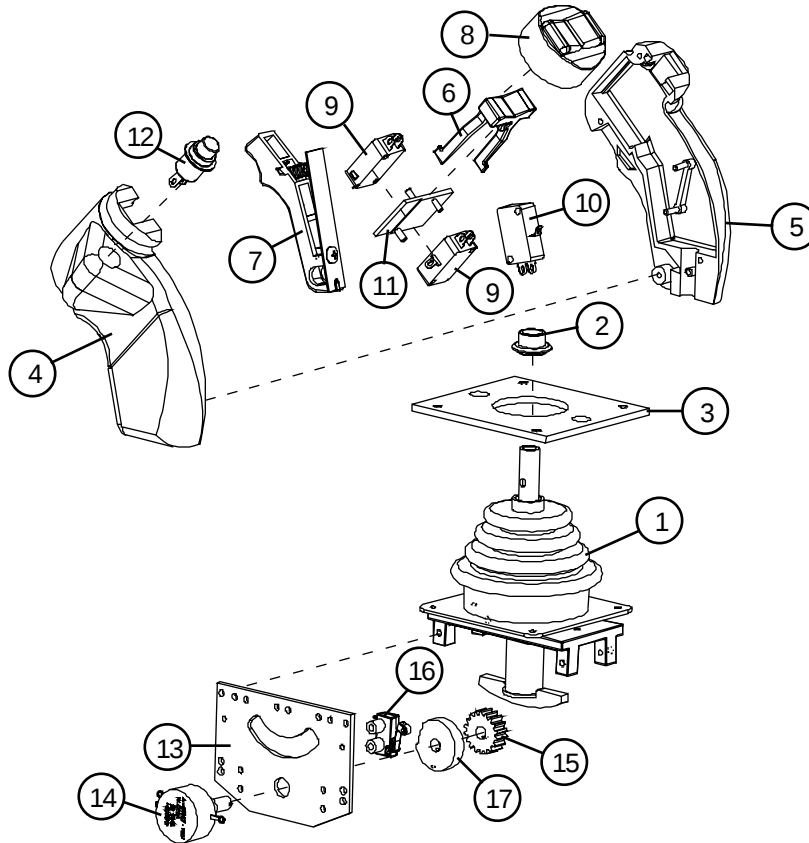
DRIVE/STEER CONTROLLER ASSEMBLY
